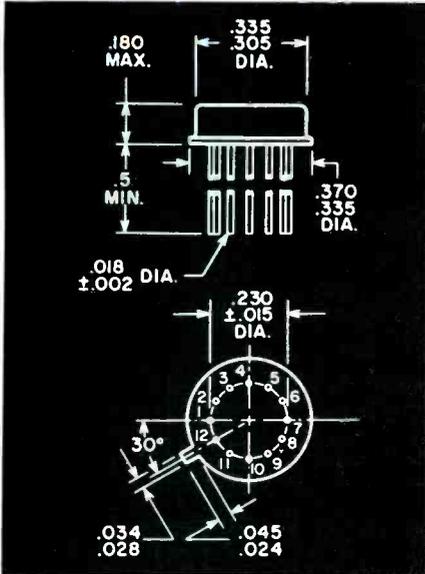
The dimensions of an integrated circuit sold by an electronics supply company for \$2.80. Courtesy of RCA.
